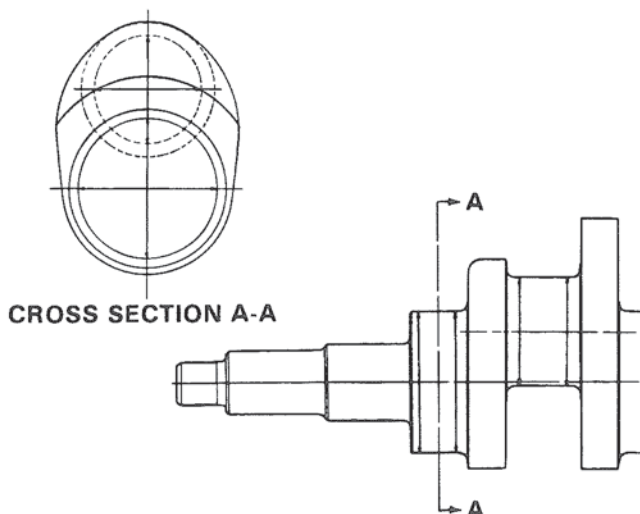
Measuring Outer Diameter of Crankshaft Journal and Pin.
